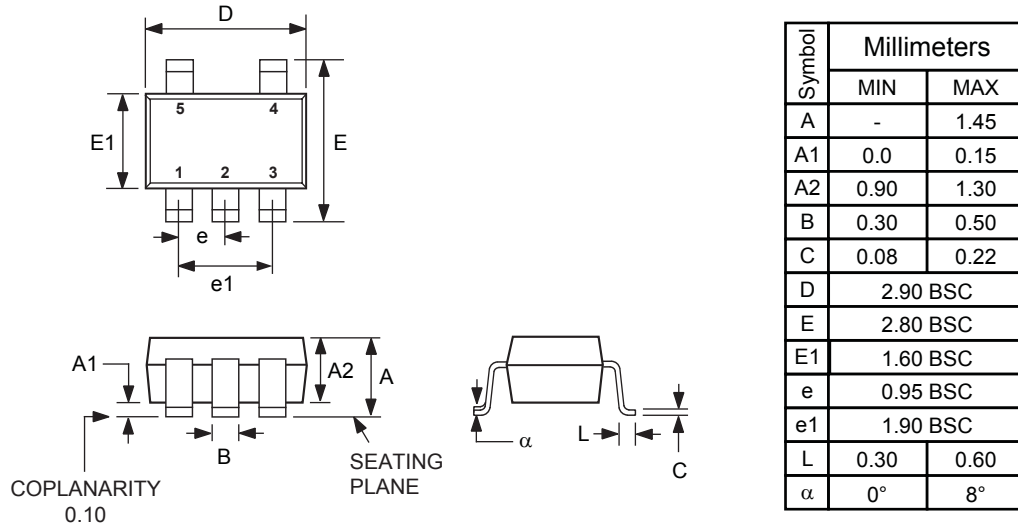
Physical dimensions, 5-lead SOT-23 package
